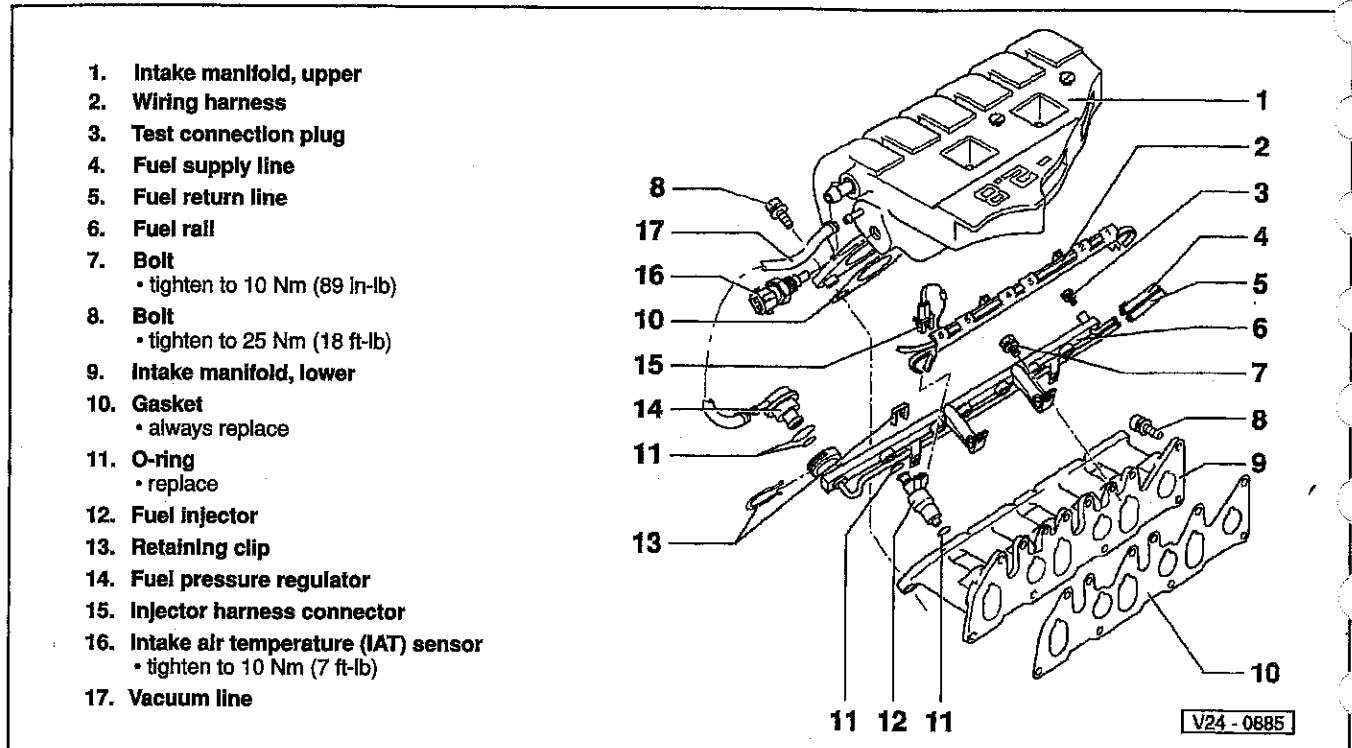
Fuel rail assembly on 6-cylinder engine.
